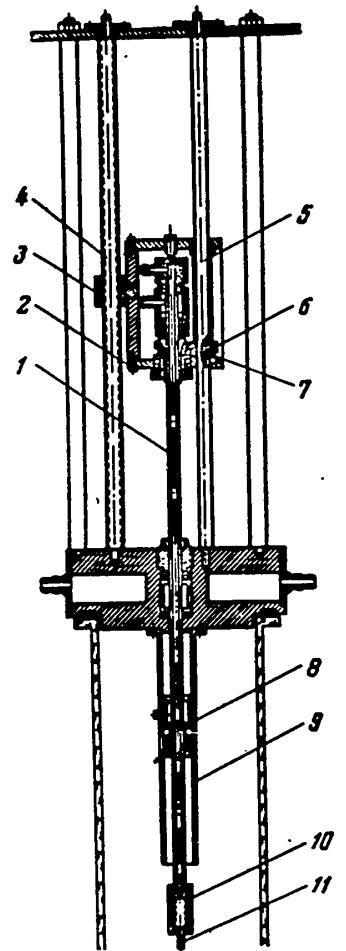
Cover with Mechanism for Withdrawing and Rotating the Crystal
